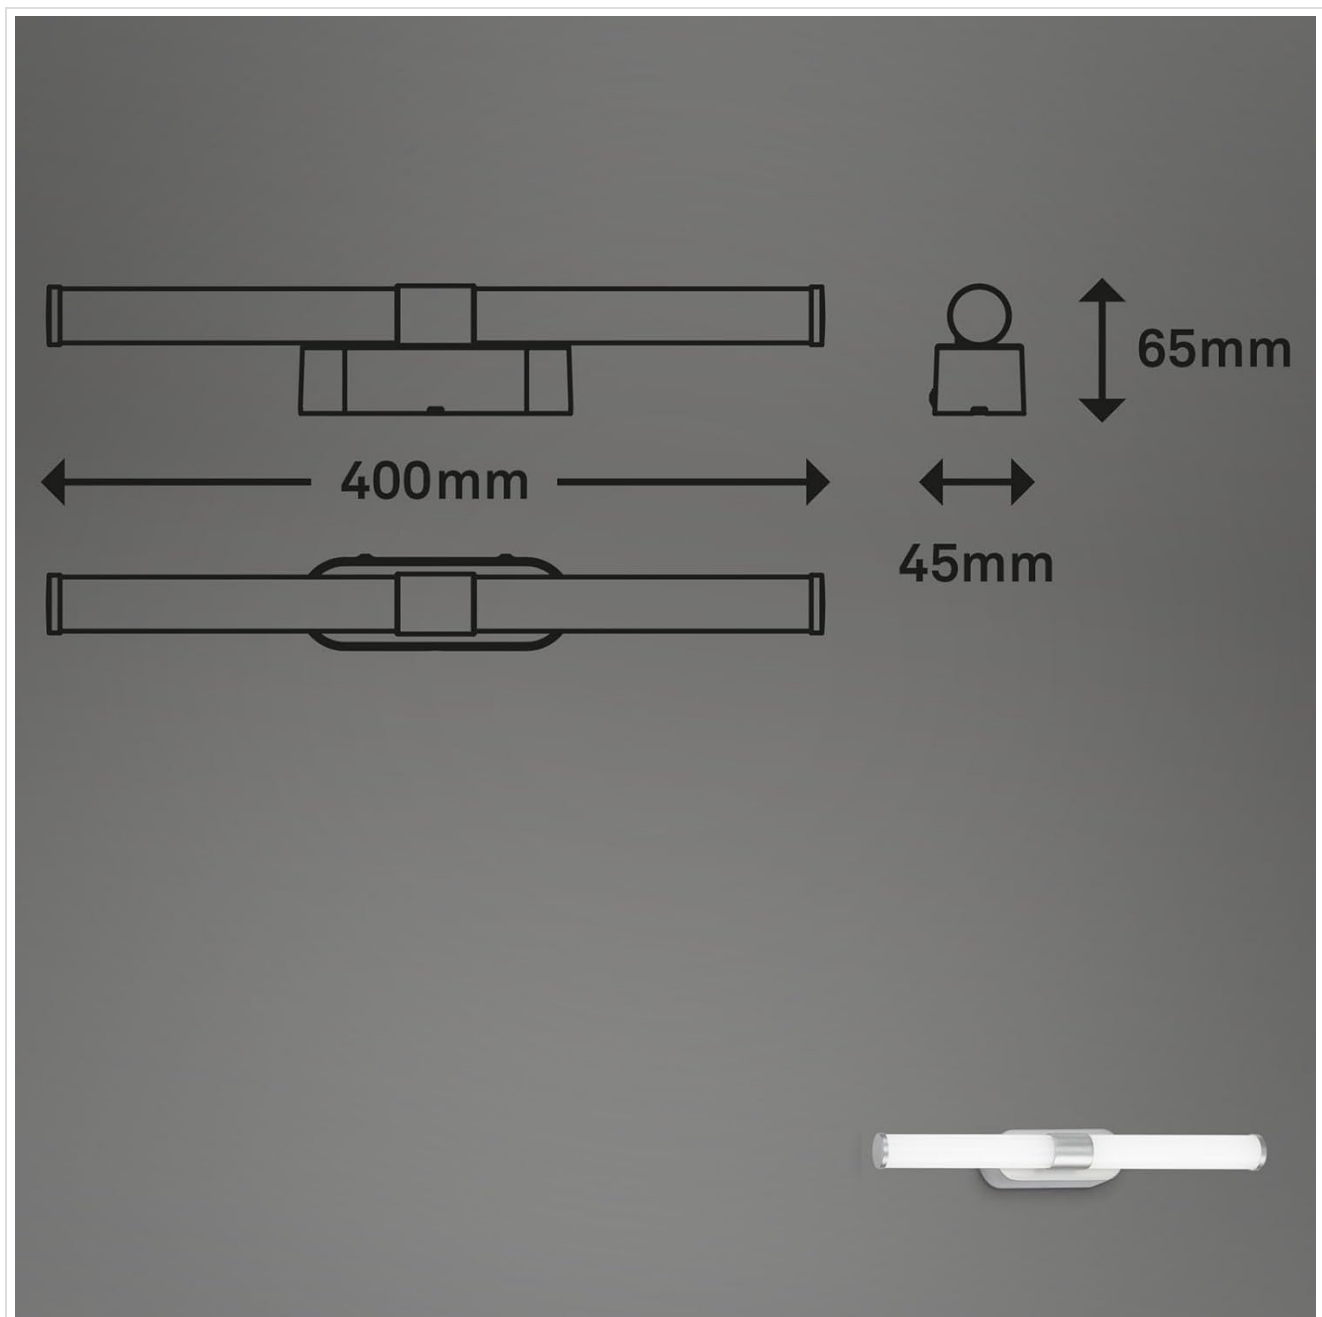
Dimensional drawing of the light fixture (400mm length, 65mm height, 45mm depth).
